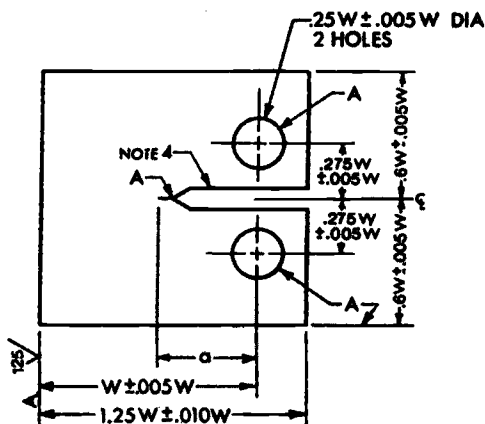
Standard compact tension specimen geometry (ASTM E 399).
